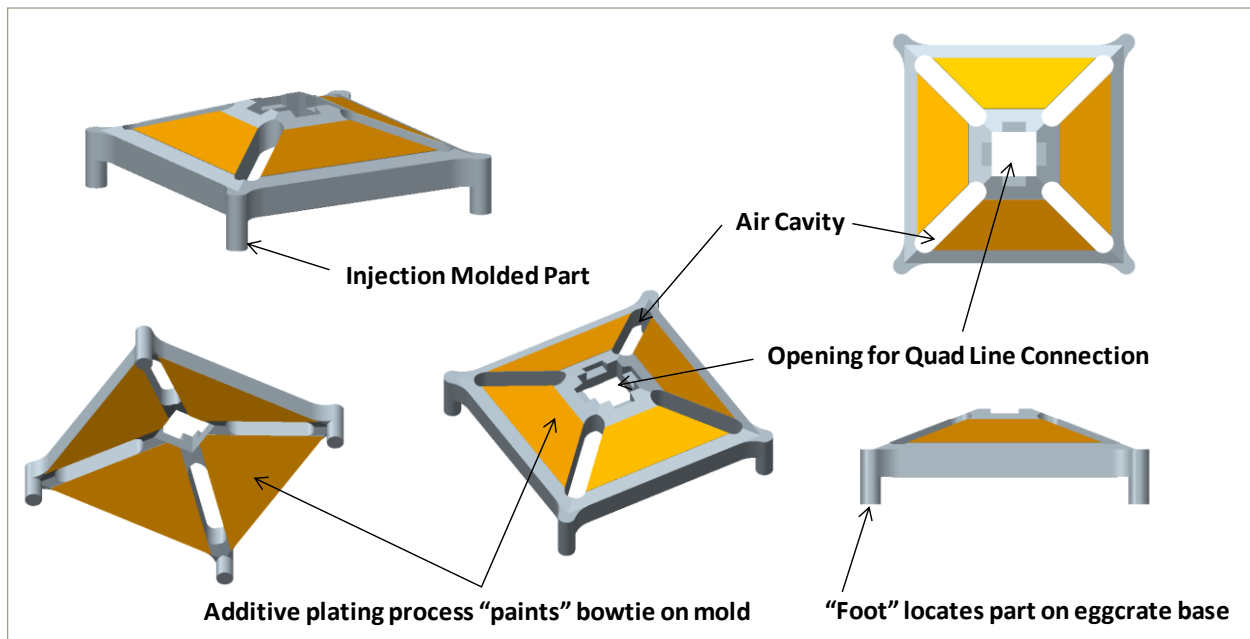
Injection molded, plated Gen 2.0 droopy bowtie radiator model
